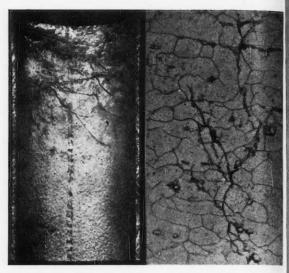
Stress corrosion cracks in austenitic stainless steel tube.
